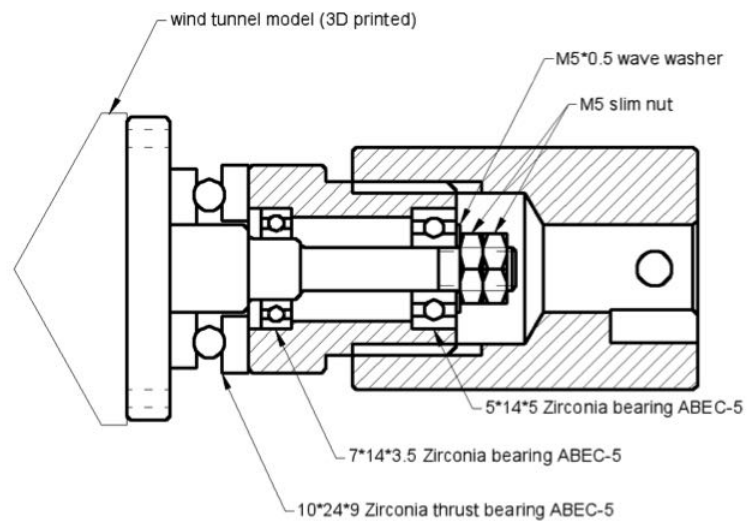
Free-spinning jig designed for the HSST tunnel: assembly
